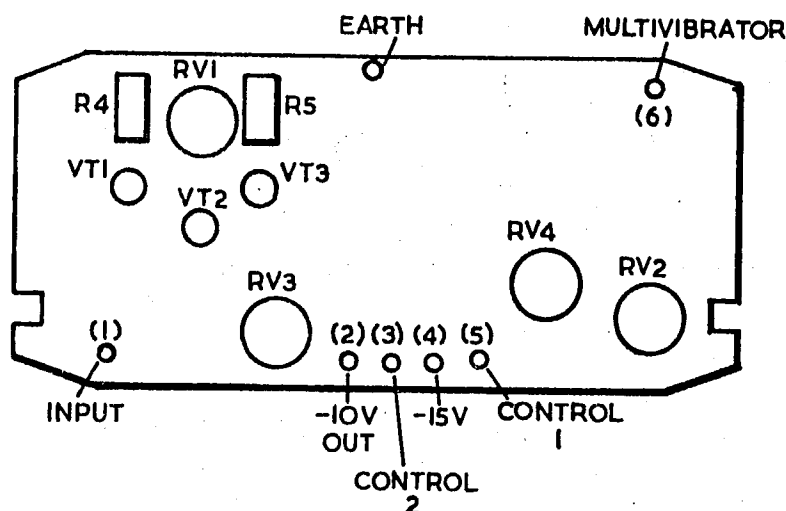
BOARD J, VIEWED FROM COMPONENT SIDE
